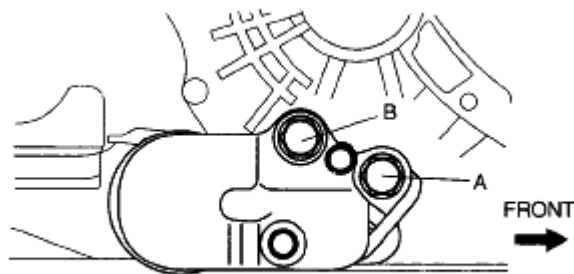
Identifying No.1 Engine Mount And Front Crossmember
